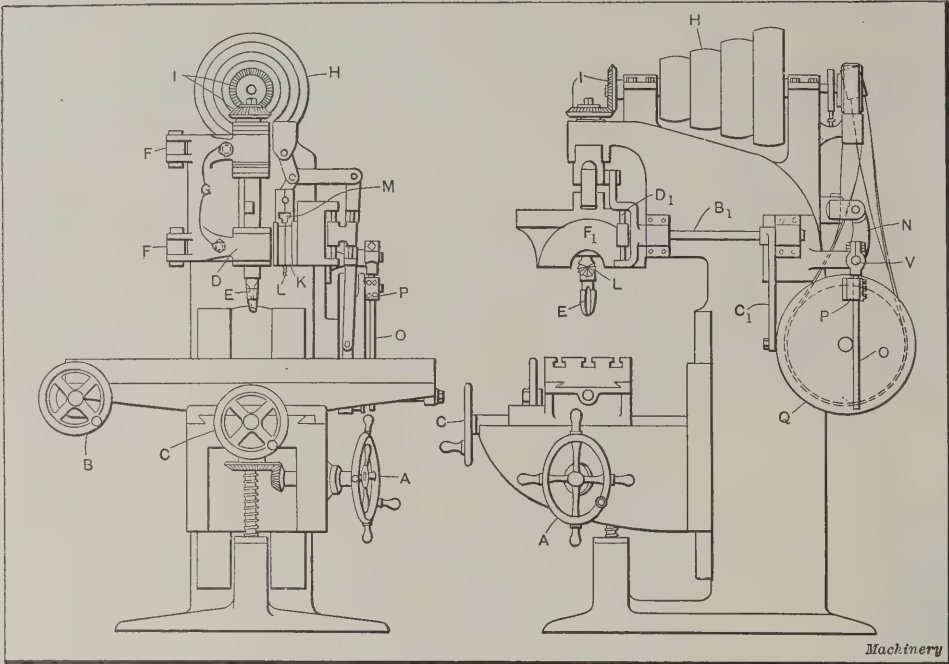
Front and Side Elevations of the Melling-Northrup Die-sinking Machine
